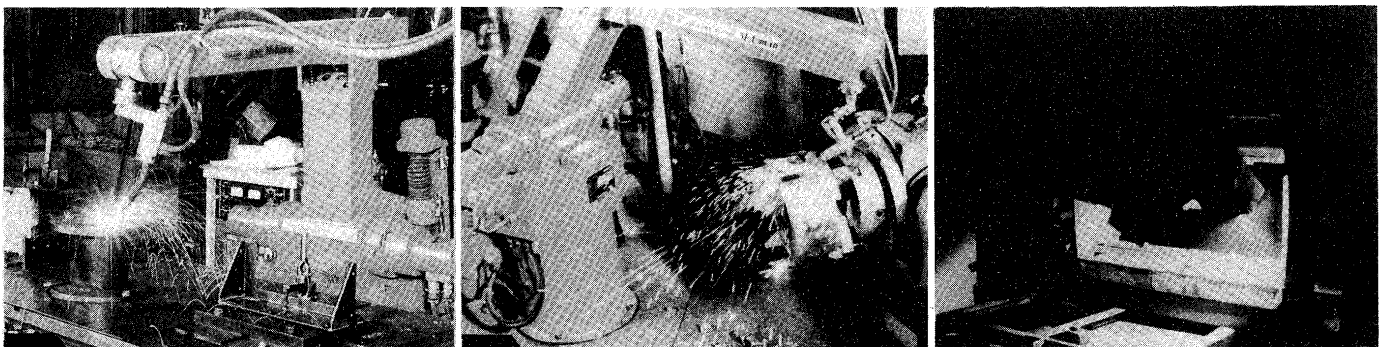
Typical welding robots for arc welding, cutting and flame spraying.
